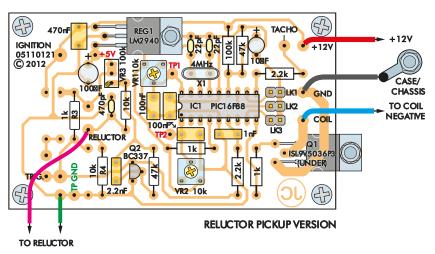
follow this PCB layout diagram if your car's distributor has a reluctor pick-up. Note that Q1 mounts under the PCB and is secured to the bottom of the case using an M3 \times 10mm machine screw and nut – see Fig.11.
